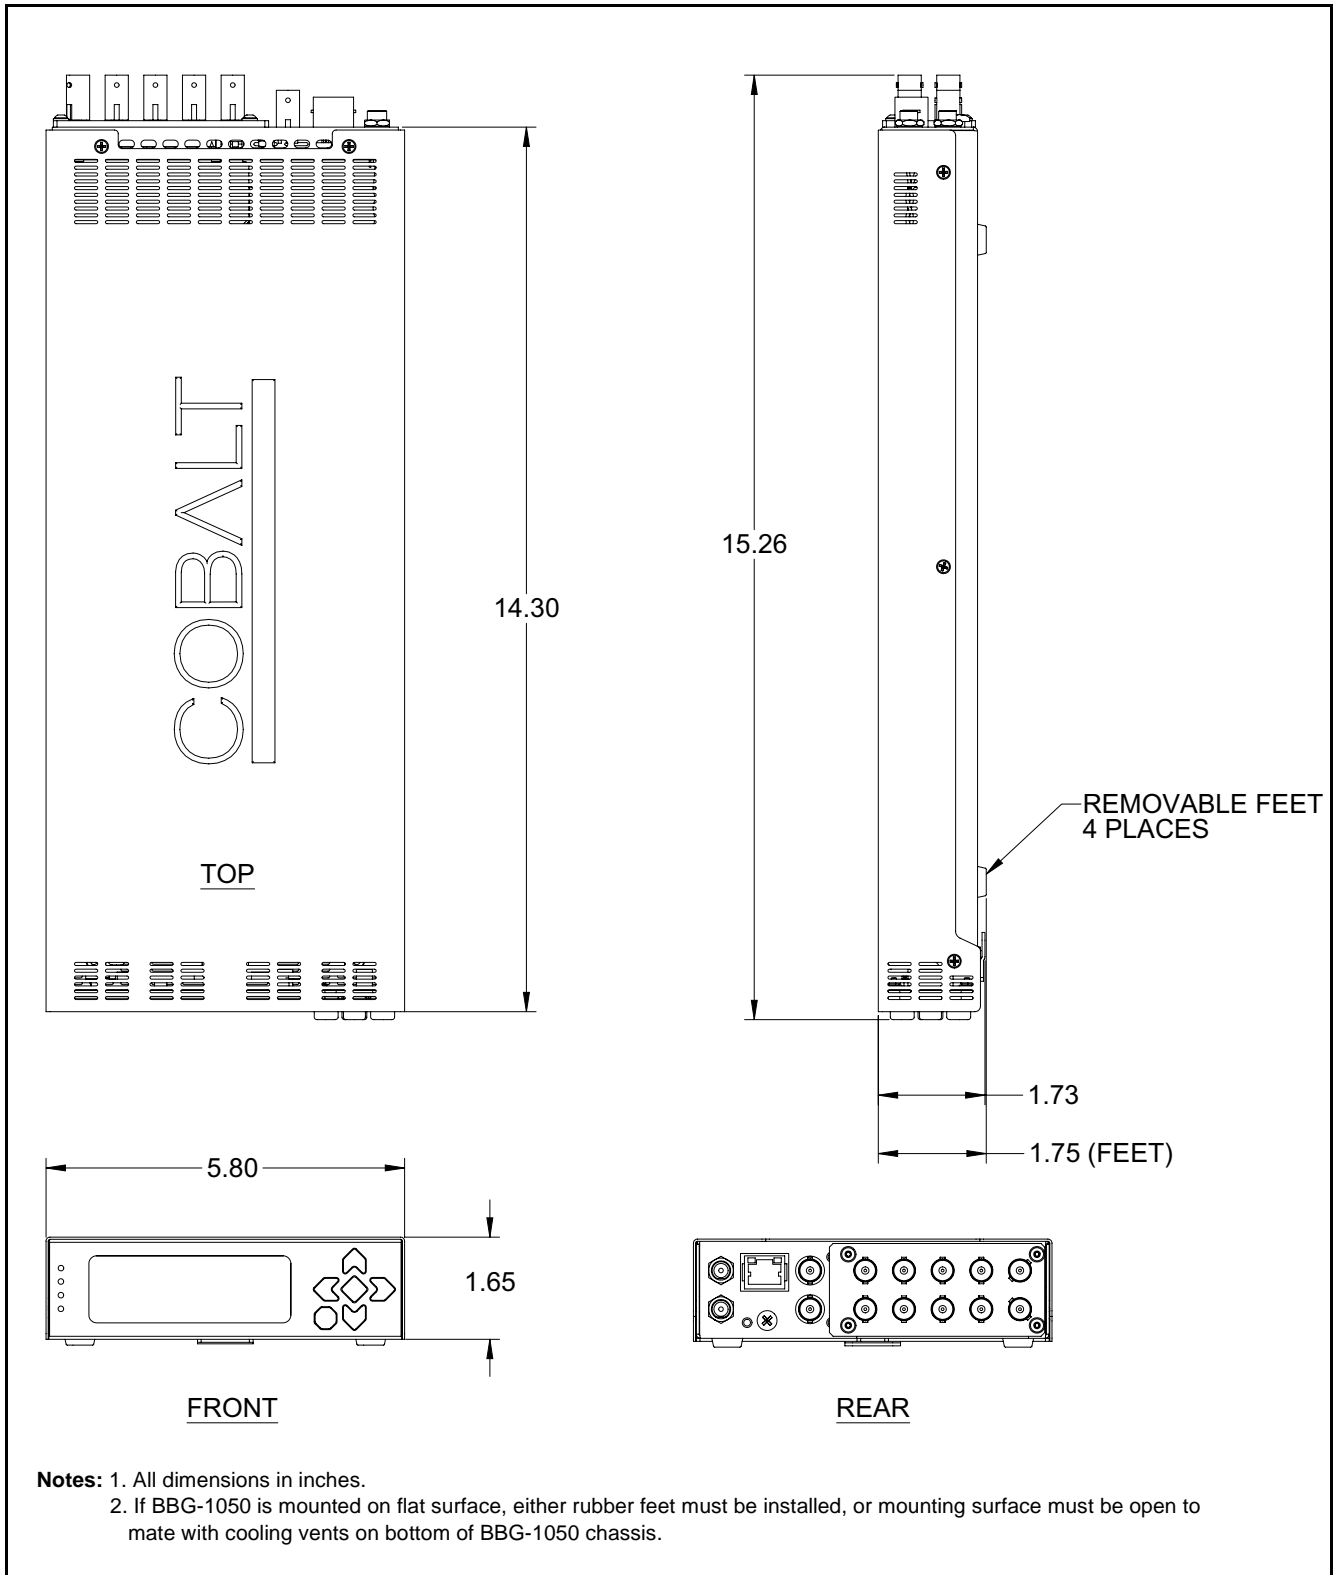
BBG-1050-EMDE-ANC Dimensional Details
